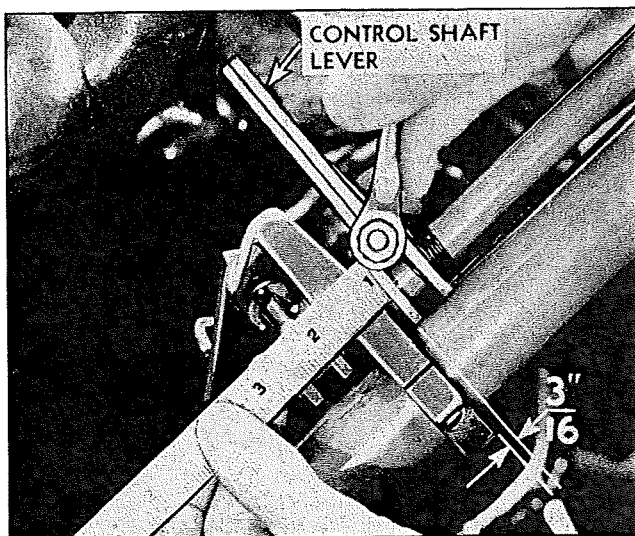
Chevrolet 1939. Control Shaft Lever Adjustment
